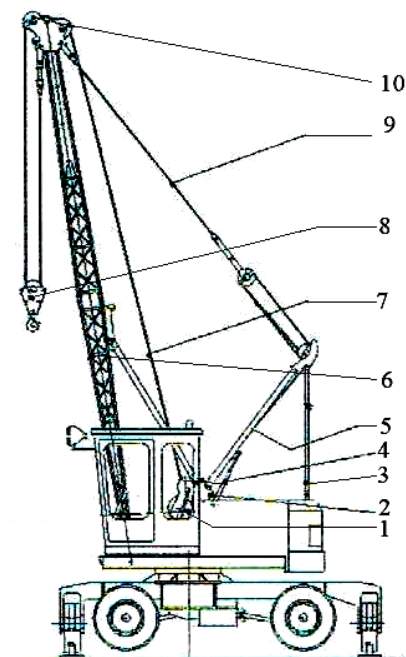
Constructive sketch of the crane equipment adapted to hydraulic tire excavator
